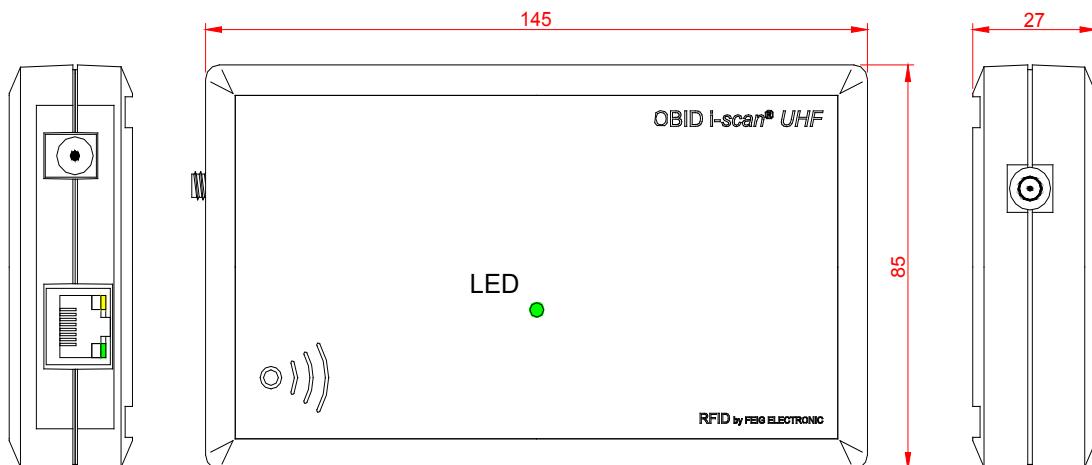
Dimensions of the housing version (all dimensions are in mm)
